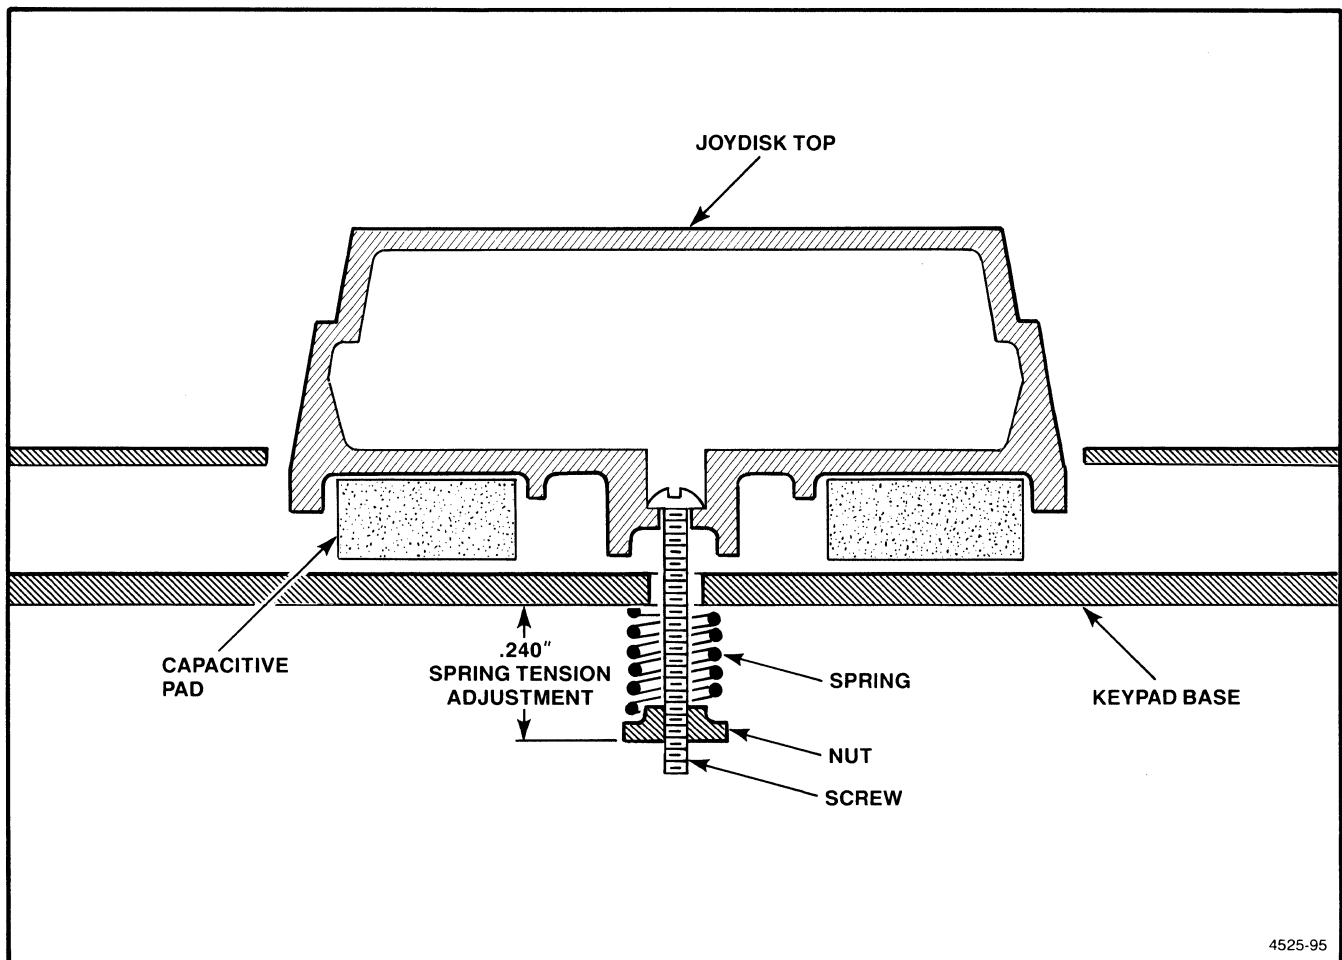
Installing the Joydisk and Adjusting the Spring Tension.
